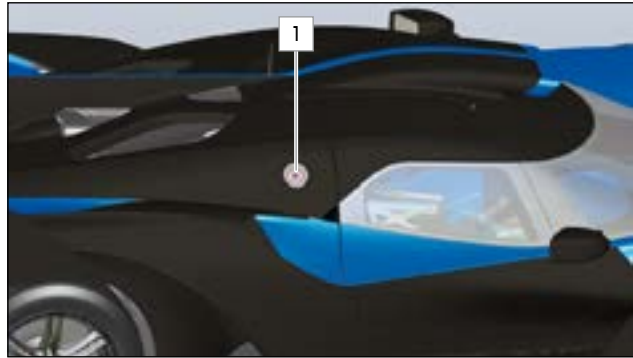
ON THE PASSENGER SIDE: FUELLING VALVE
